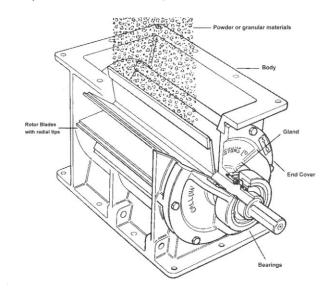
Rotary valve for dry solids Courtesy of Callow Engineering Ltd (A Division of J Fletcher Engineers Ltd)
